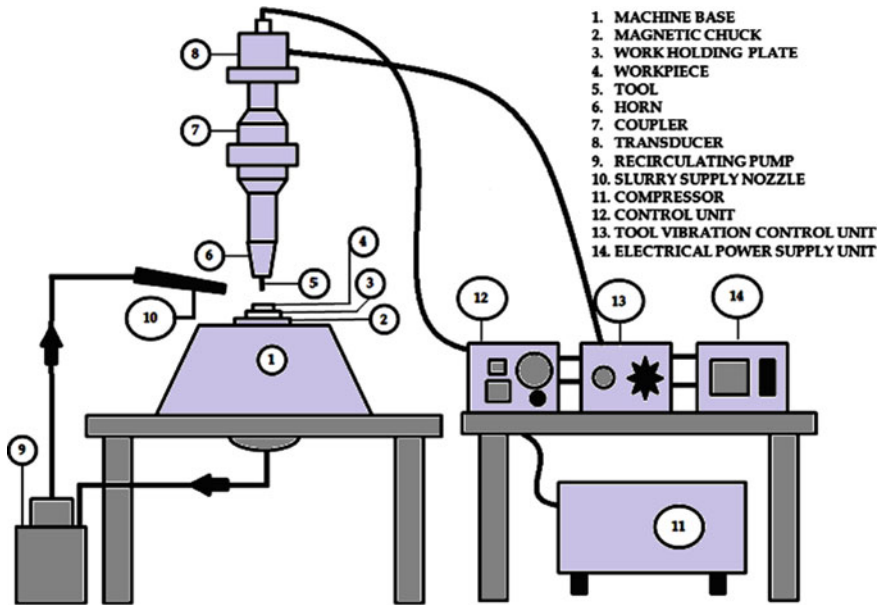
Schematic diagram of ultrasonic machining set-up with process equipments
